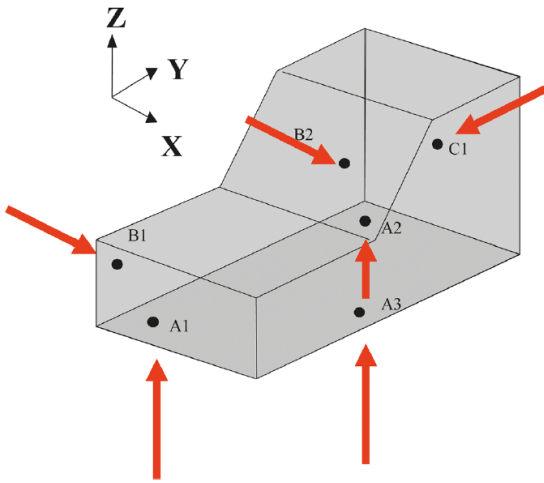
3-2-1 locating scheme for rigid parts [6].
